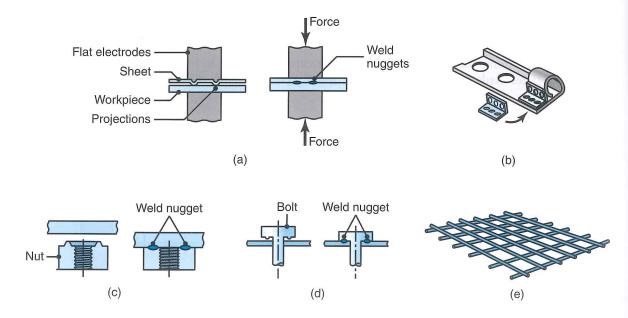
(a) Schematic illustration of resistance projection welding. (b) A welded bracket. (c) and (d) Projection welding of nuts or threaded bosses and studs. (e) Resistance-projection-welded grills.
